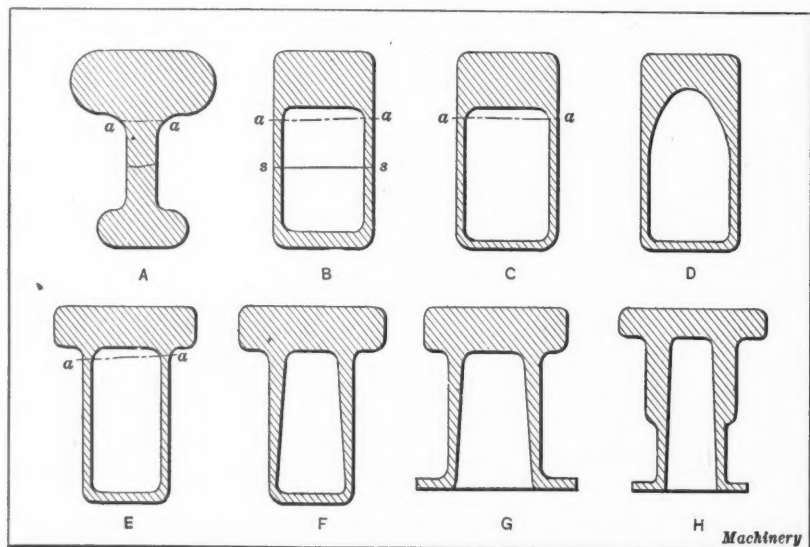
Solid and Box Frame Sections Common in Punching and Shearing Machine Design
